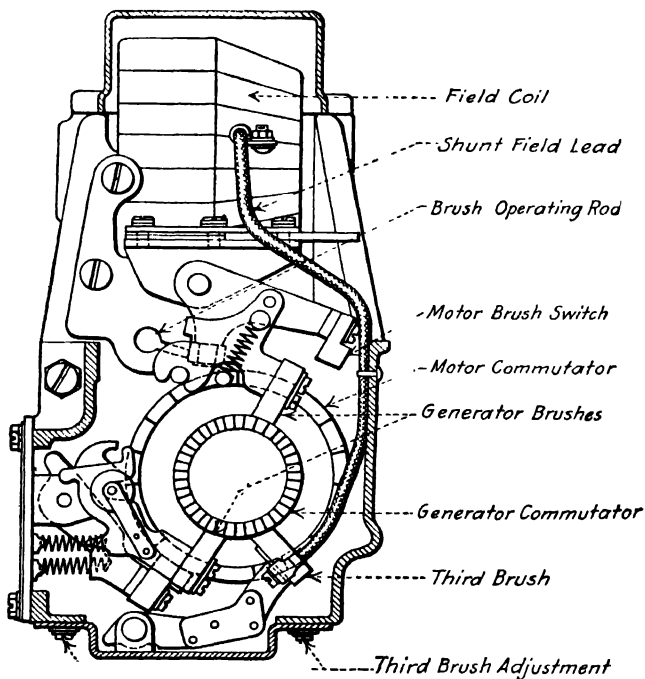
End View of Motor Generator Showing Motor-brush Switch.
